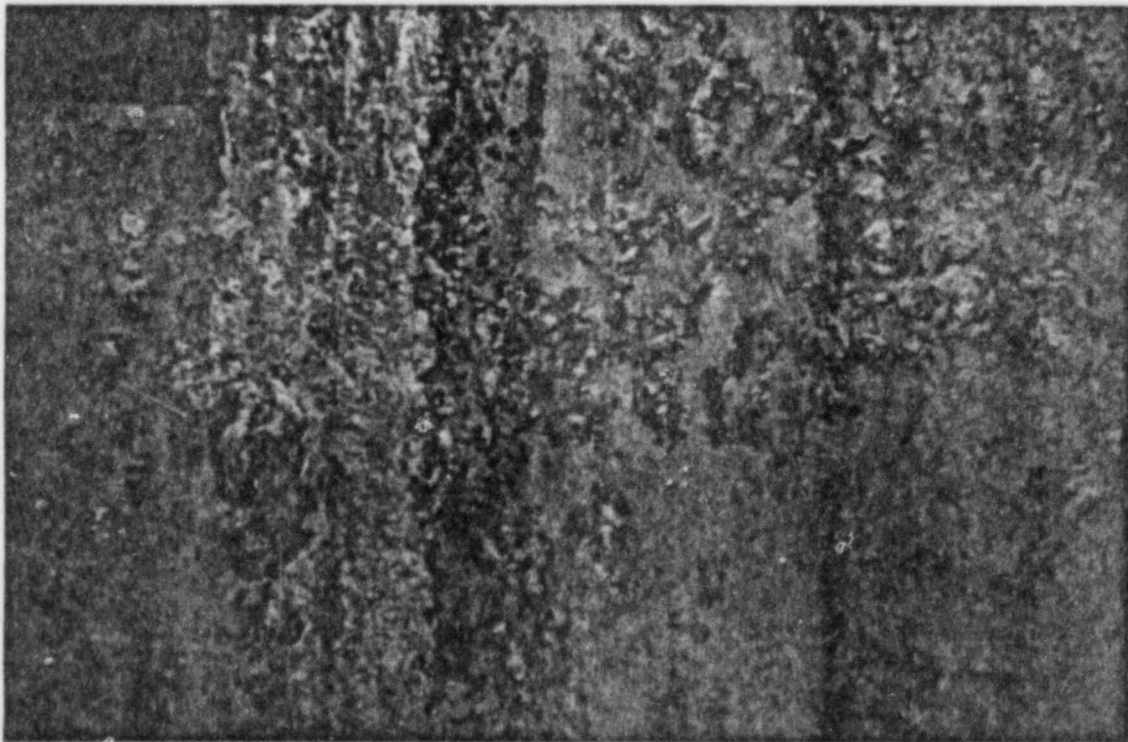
Tank 8D-2 Weldment Before Wire Brushing,
